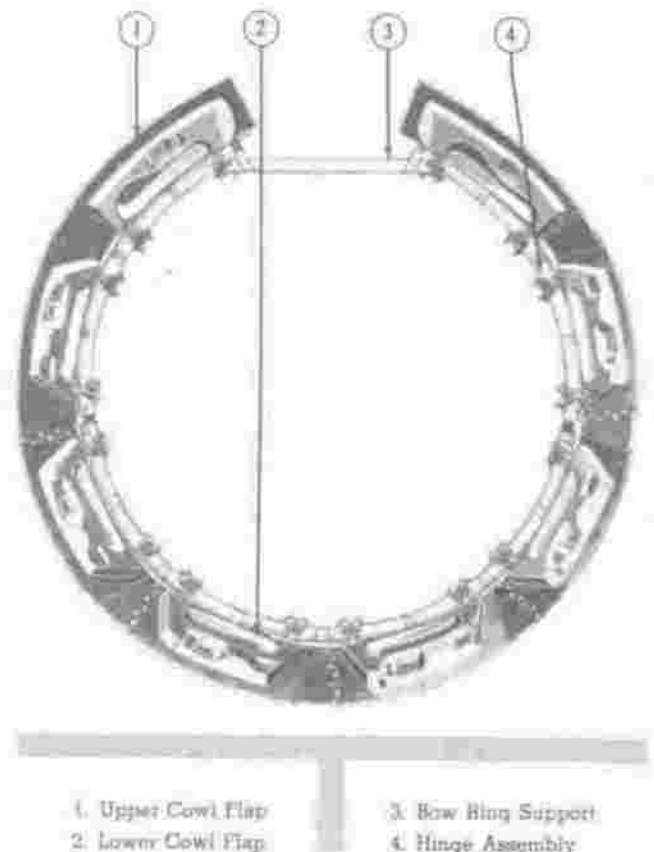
Cowl Flap and Bow Ring Support Assembly
